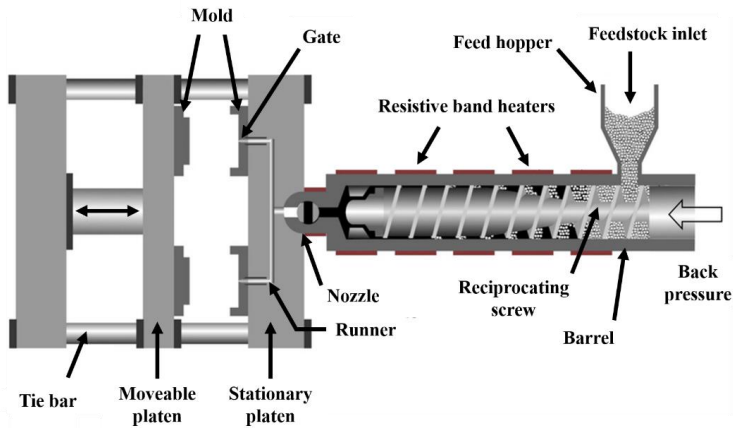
1: Cutaway view of the injection molding process, adapted from [228].
